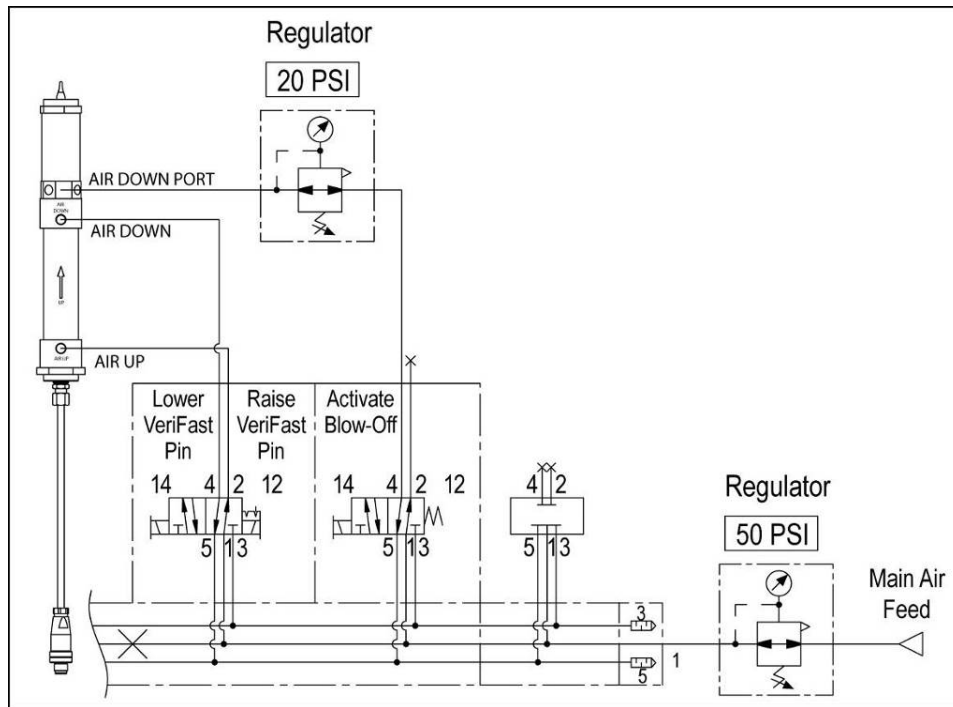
Pneumatic Connection Diagram for LVDT Clamp Mount Weld Body (Only) with Retractable Pin
